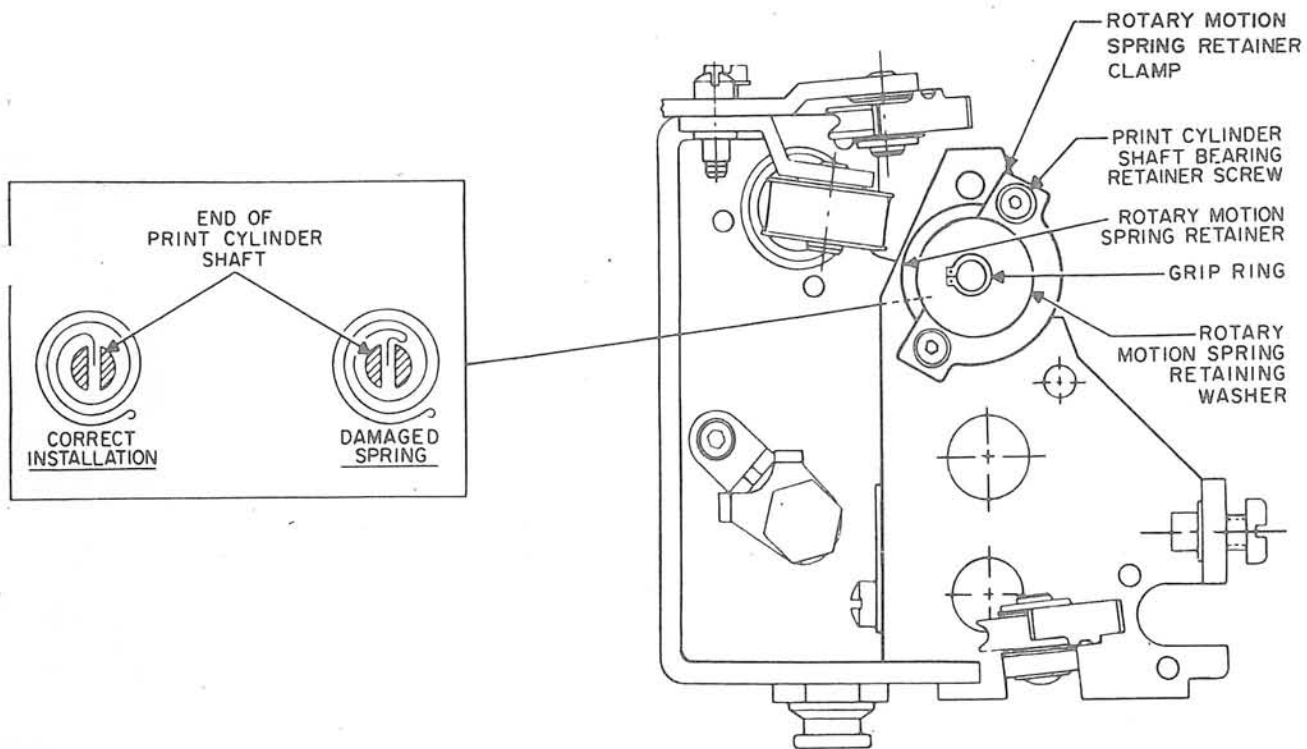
Rotary Cable Replacement, Left Side View of Printer
